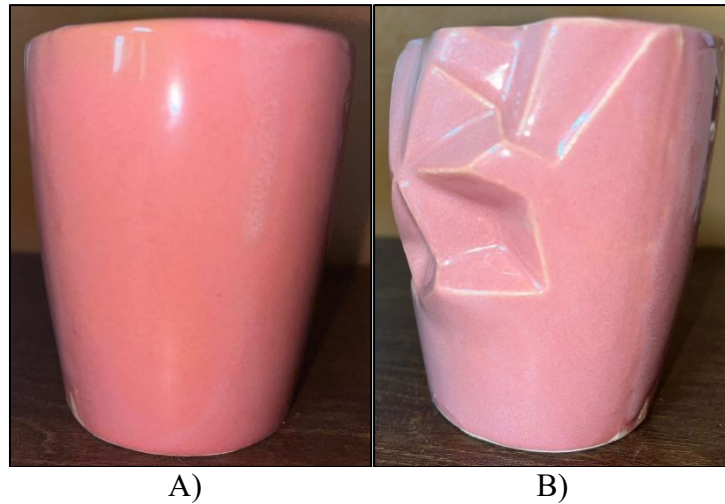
Geometry Cup Casting Use RPOP Mould After Glazing
